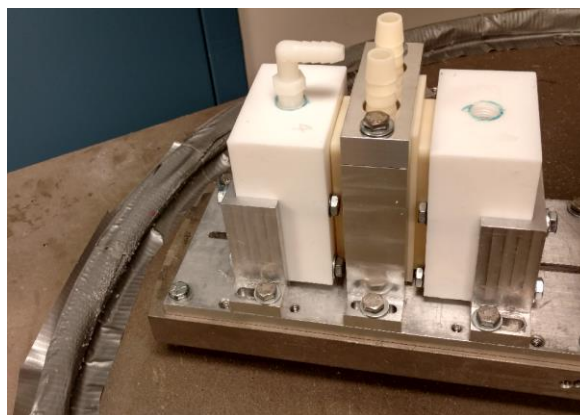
The PAD potting fixture attached to the centrifuge arm.
